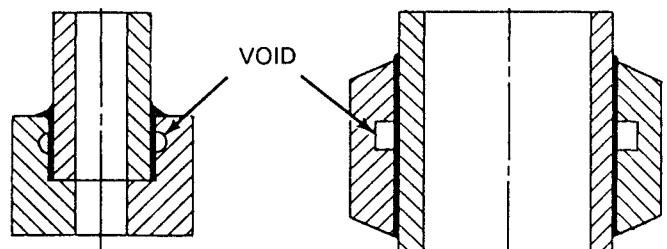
Brazed Joints with Grooves for Preplacement of Filler Metal; After the Brazing Cycle the Grooves are Void of Filler Metal
